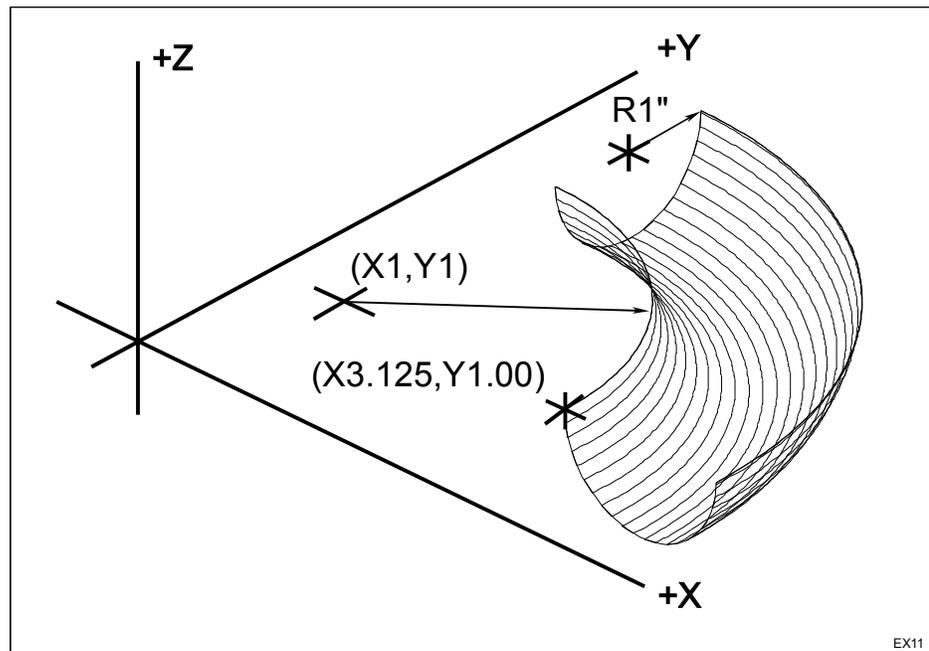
, Layout for Sample Program #10, Elbow Milling
